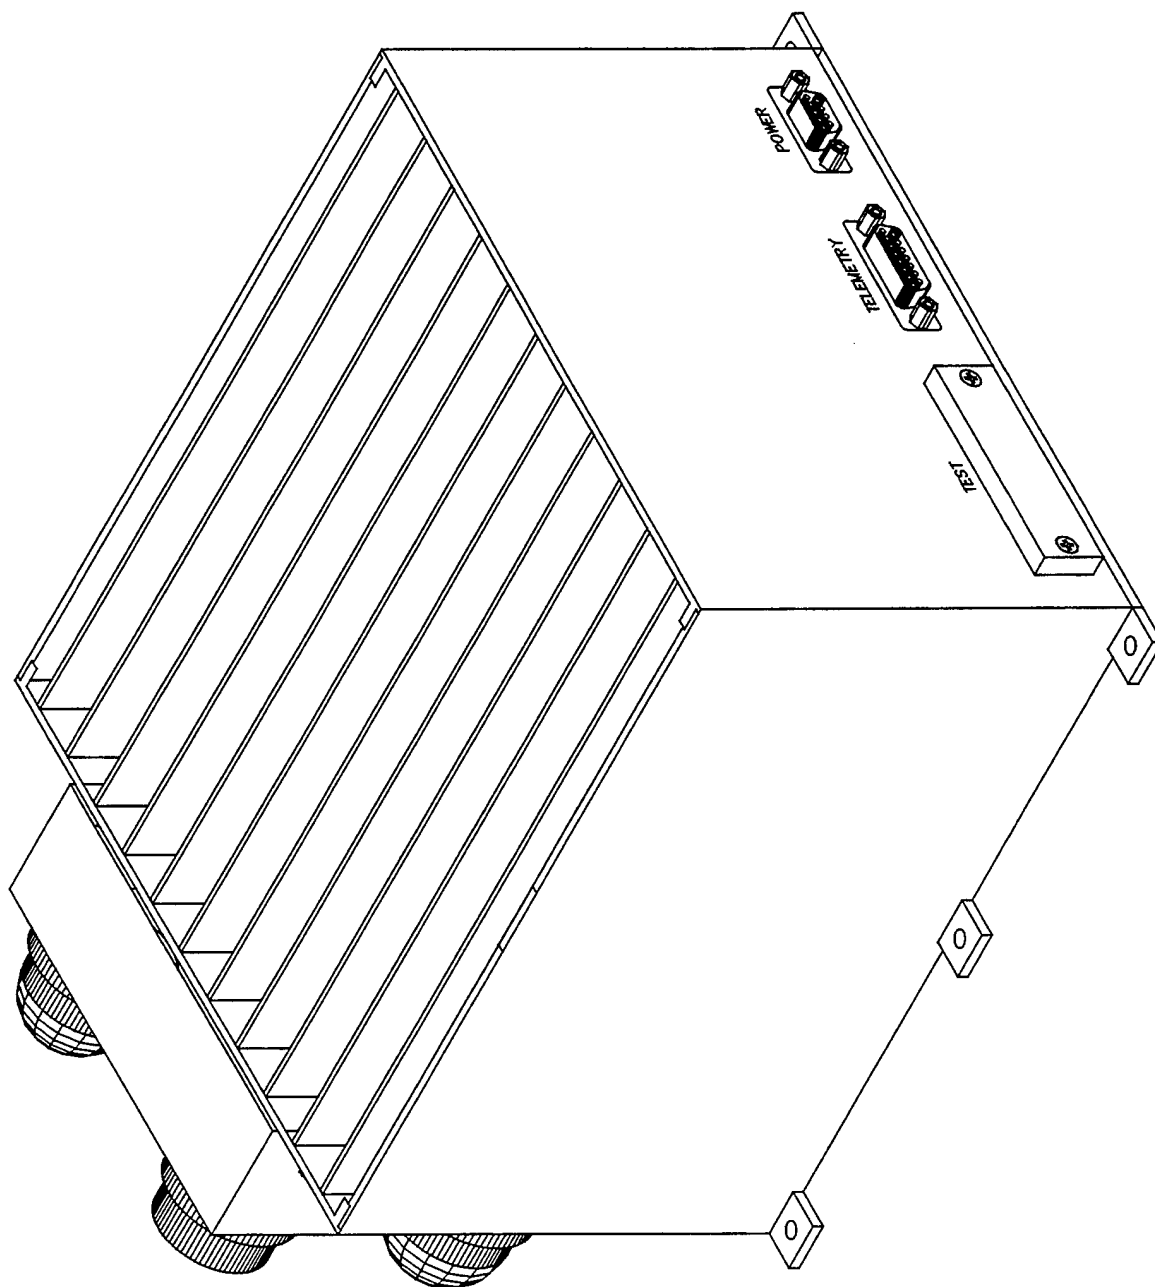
Isometric View of Dosimeter with Top Cover Removed
